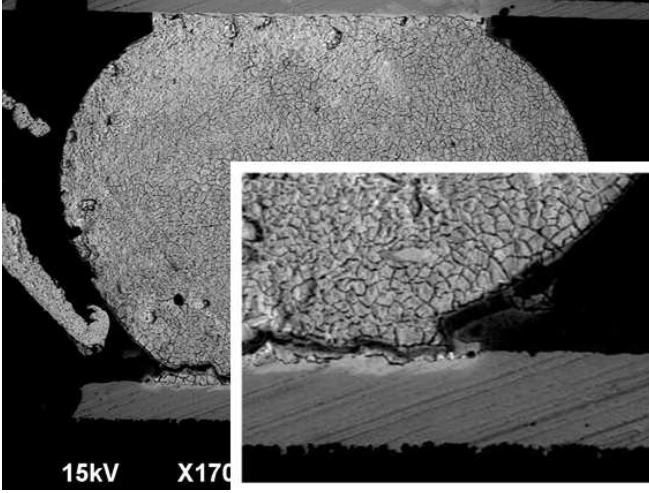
SEM image of a failed SnPb solder joint in an 8-stack assembly [26].
